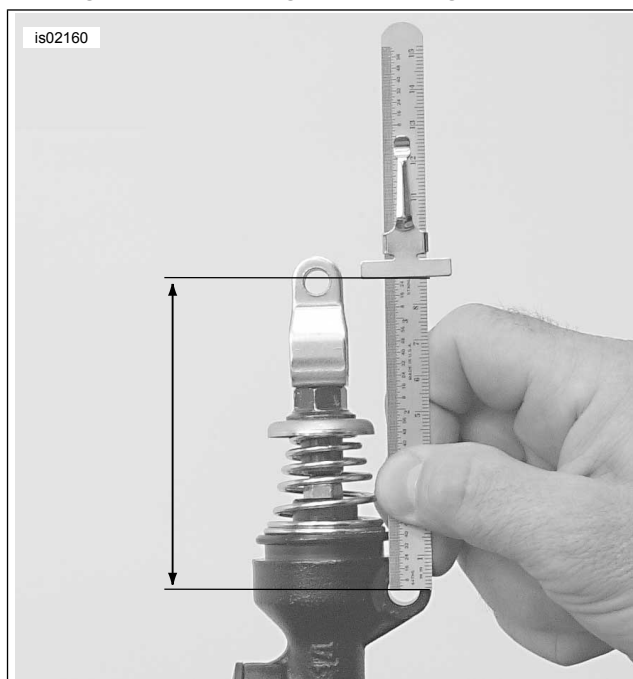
Adjusting Push Rod Length (87.3 mm +/- 1 mm)
